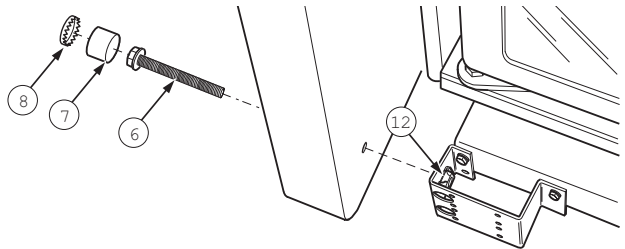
A. Fasten Lower Front – ALL Models Except RLT
